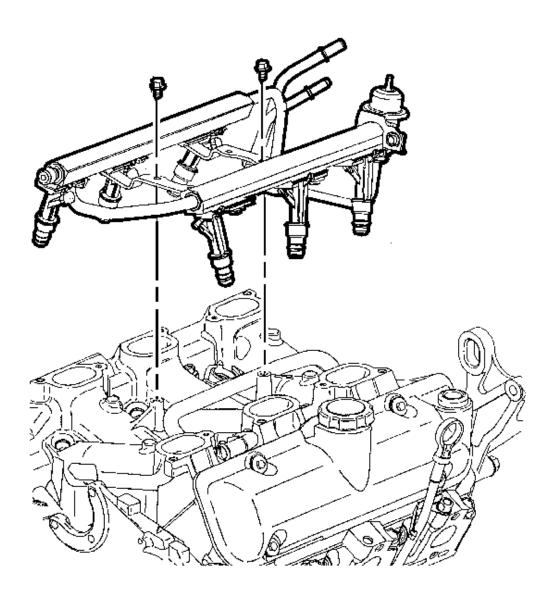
View Of Fuel Injector Rail Assembly Courtesy of GENERAL MOTORS CORP.
